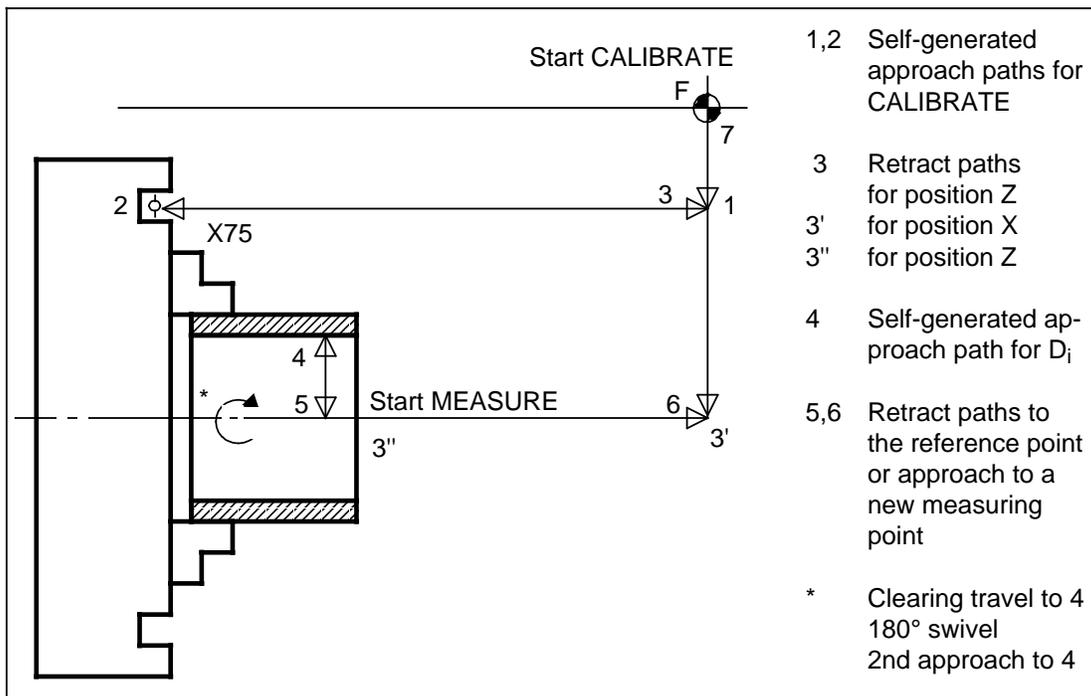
1-point measurement with reversal on inside diameter with CALIBRATE
